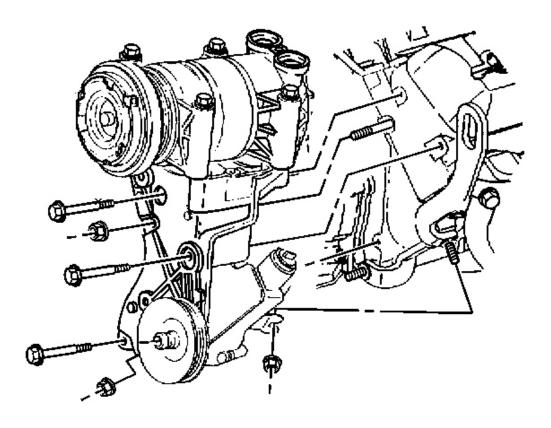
View Of Power Steering Pump Bracket Courtesy of GENERAL MOTORS CORP.
